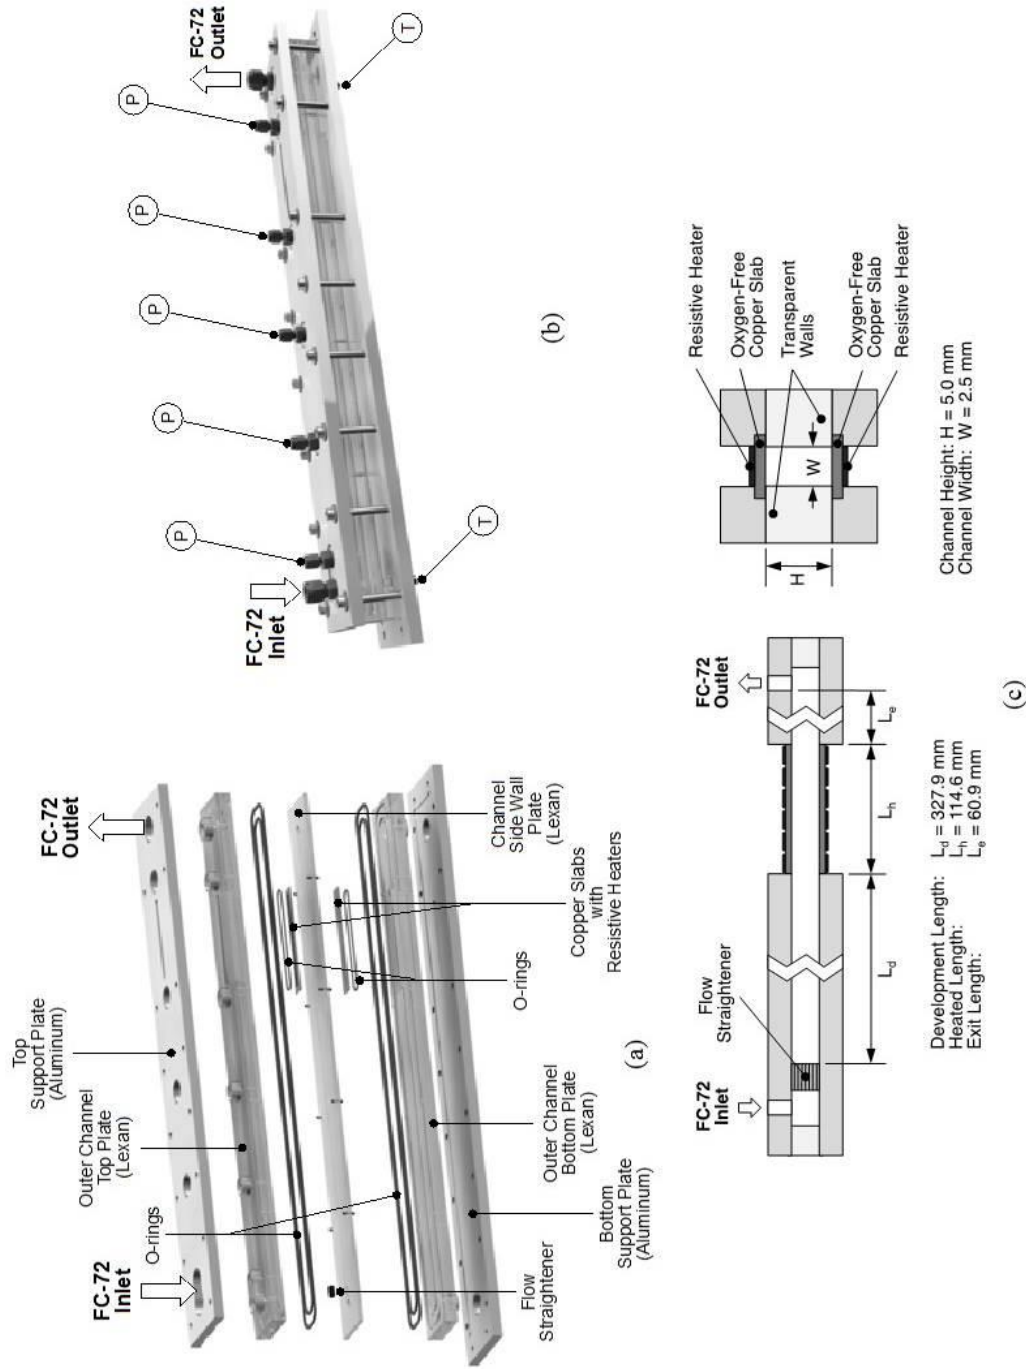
(a) Exploded view of Flow Boiling Module (FBM). (b) Assembled view of FBM. (c) Key dimensions of flow channel.
